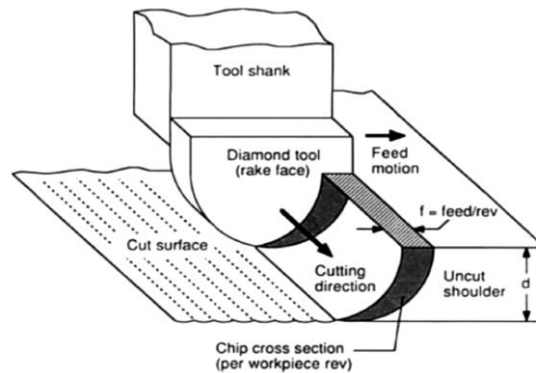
View of the actual cutting geometry using the round nose tool [3]
